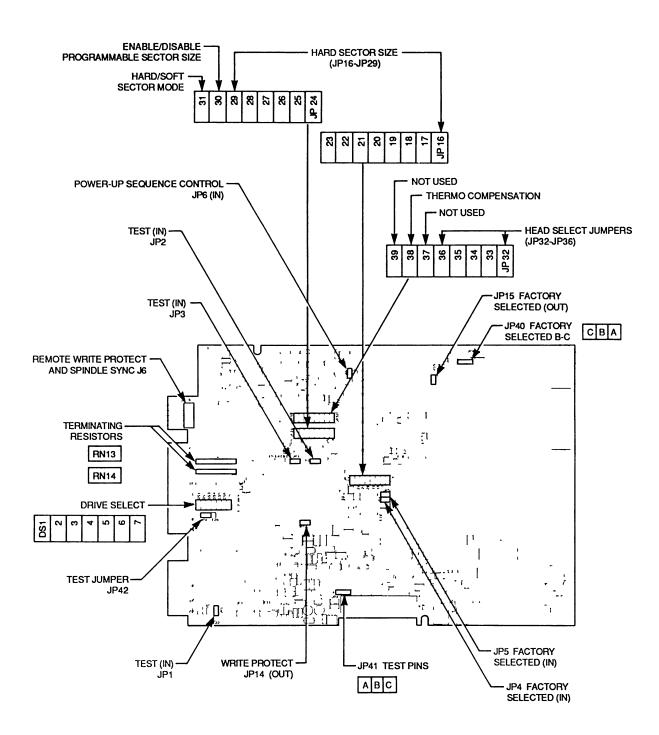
SI56 and SI57 Jumper and Switch Locations
